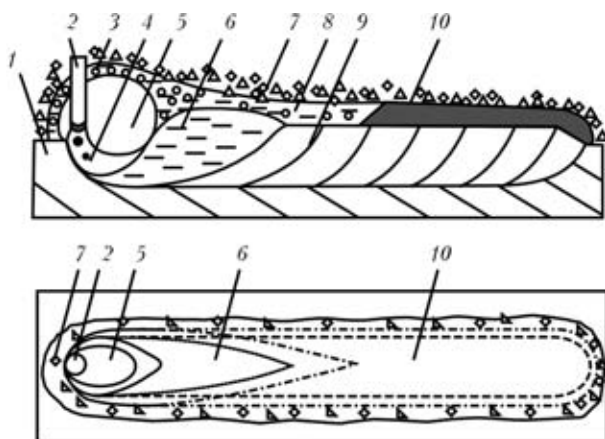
Schematic of the process of electric submerged-arc welding according to the current concepts: 1 – base metal; 2 – electrode wire; 3 – slag bubble; 4 – arcing zone; 5 – crater; 6 – weld pool; 7 – flux; 8 – liquid slag; 9 – weld; 10 – slag crust
